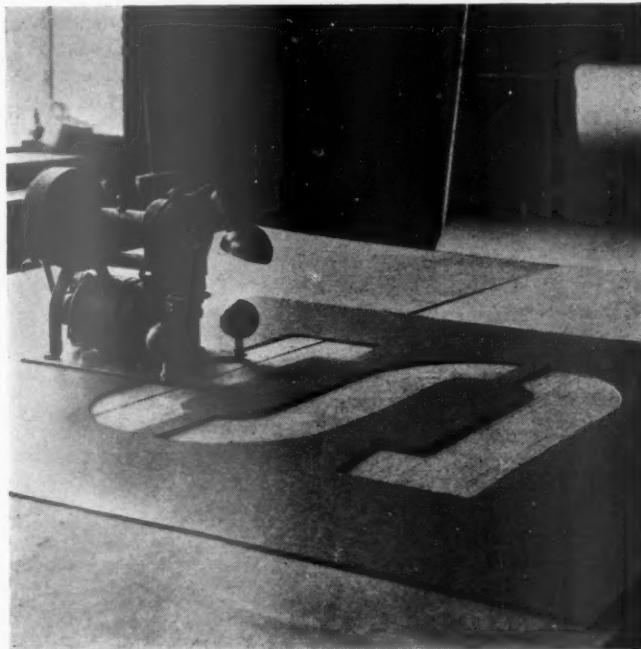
Modern electrically operated stencil-cutting machine which is both fast and accurate
